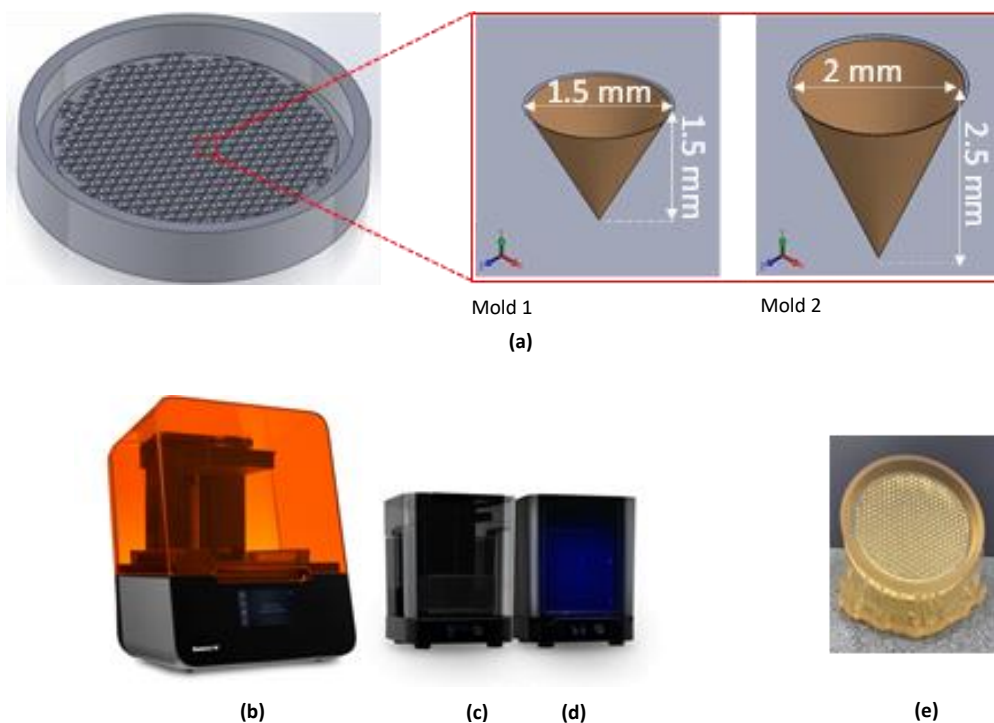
Master mold fabrication process: (a) CAD design for two molds with different cone dimensions, (b) Form 3 Formlabs 3D printer, (c) Form wash (d) Form cure and (e) 3D printed master mold.
